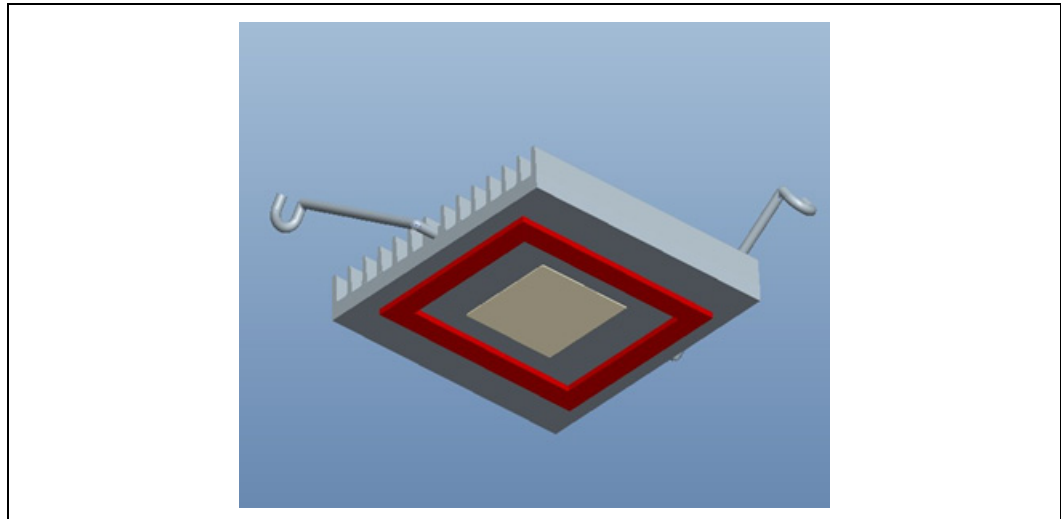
Low-Profile Torsional Clip Heatsink Assembly (View 2)
